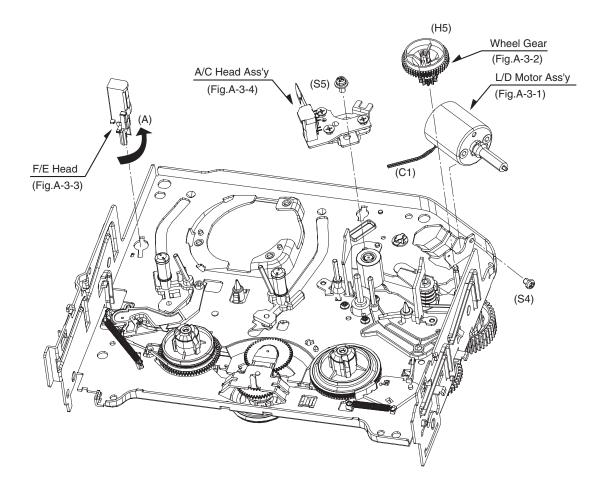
L/D Motor Ass'y, Wheel Gear, F/E Head, A/C Head Ass'y
